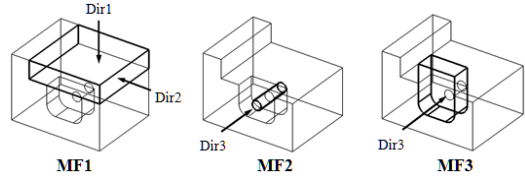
Cutter approach directions. The cutter approach directions are the identical to the set-up directions for the 3-axis milling machine.
